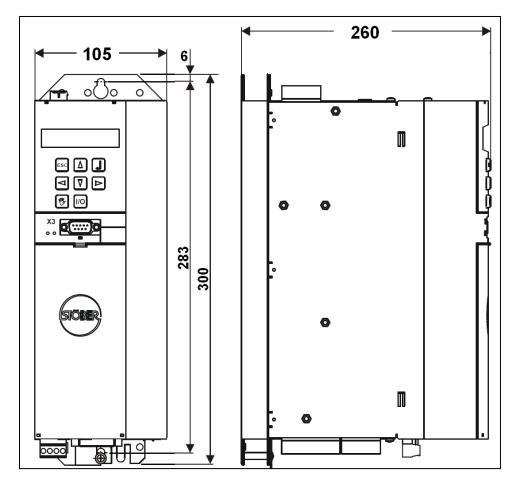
EM-80/300 Driver Dimensions (mm)
